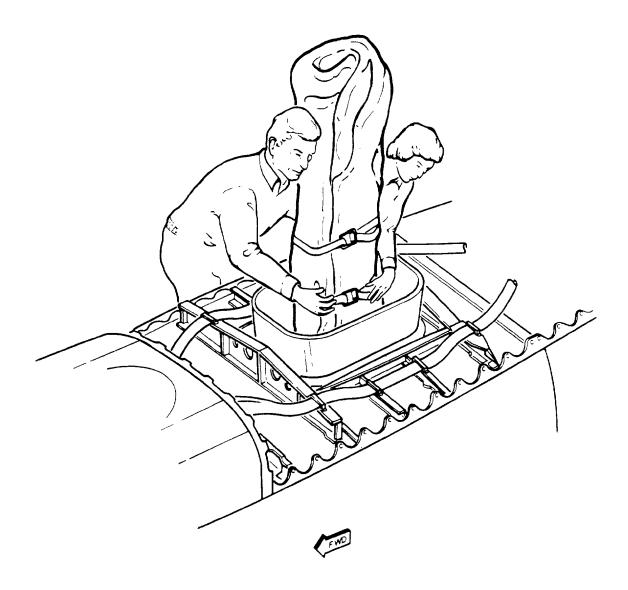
No. 1 Fuel Tank Folding (Sheet 6)
